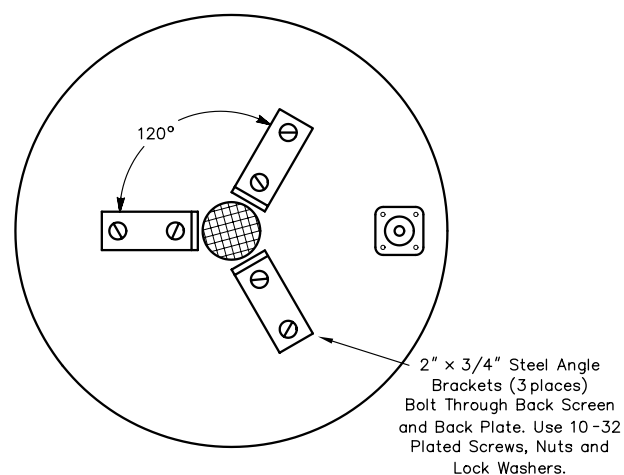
The ground plane and feed-point support assembly. The circular piece is a 10-inch diameter, $\frac{1}{8}$ -inch thick piece of aluminum sheet. (A square plate may be used instead.) Three 2 × $\frac{3}{4}$ -inch angle brackets are bolted through this plate to the back side of the reflector screen to support the screen on the pipe. The type N female chassis connector is mounted in the plate four inches from the 1-inch diameter center hole.
